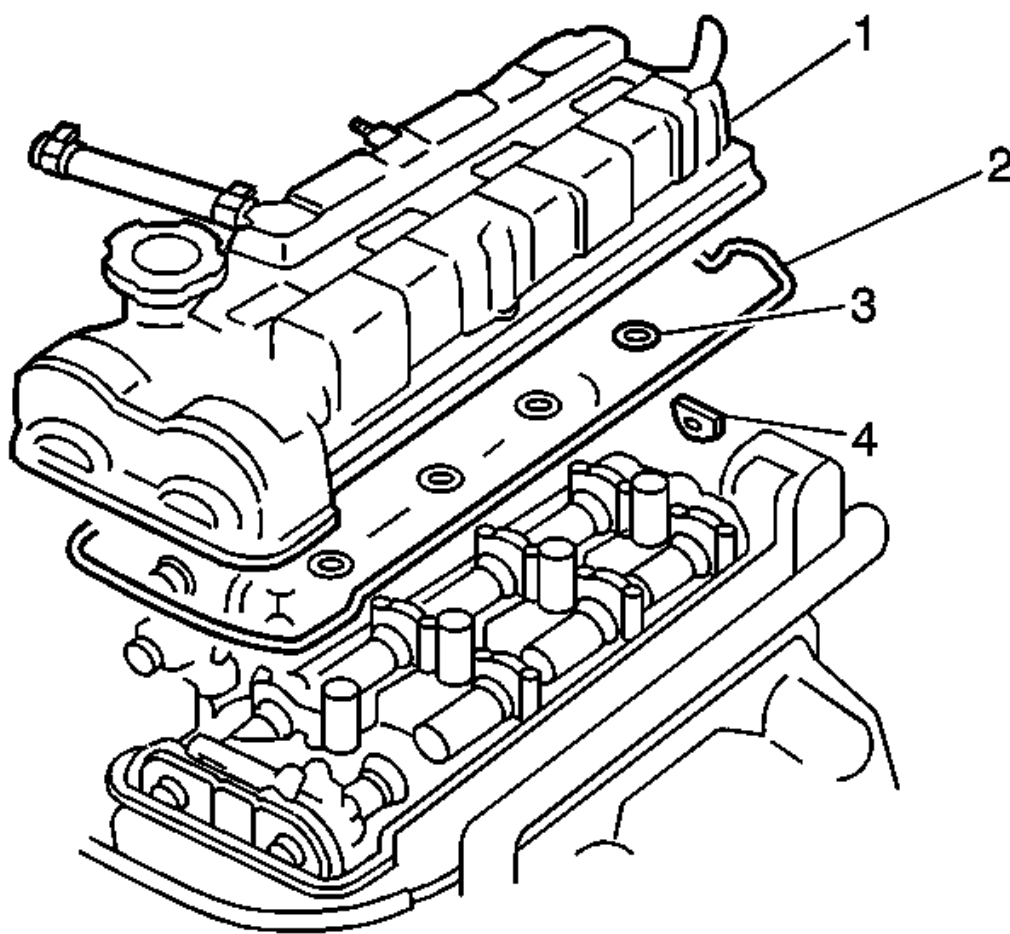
View Of Cylinder Head Cover, Gasket & O-Rings
